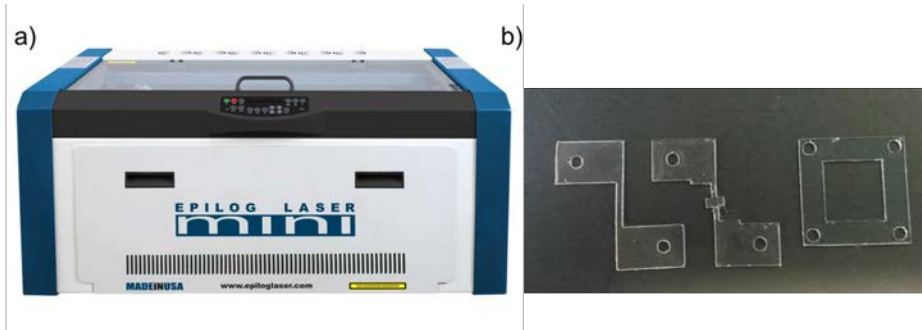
a) Epilog Mini 24 laser cutter used for the fabrication of PMMA pieces. b) PMMA pieces cut by laser. S-shaped pieces are used as spacer while the square shaped piece is used for the alignment of the heat sink adapter.
